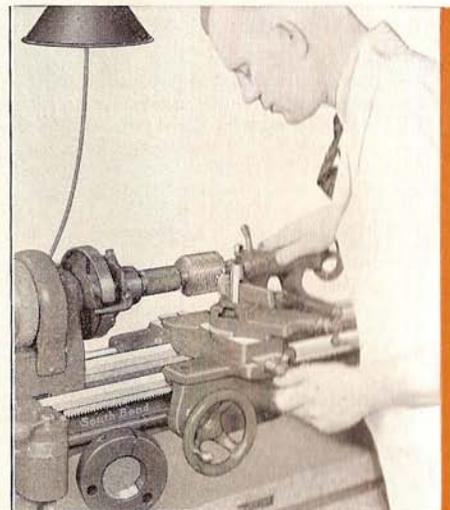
Screw Thread Cutting on the 9-inch "Workshop" Lathe.
